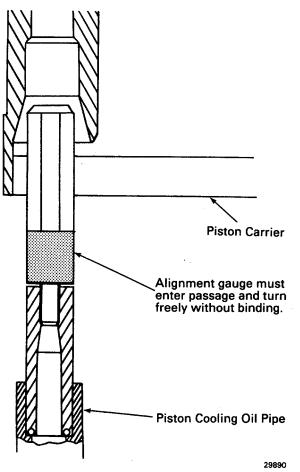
Piston Cooling Oil Pipe Alignment
